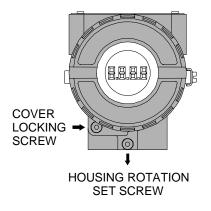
Cover Locking and Housing Rotation Set Screw
